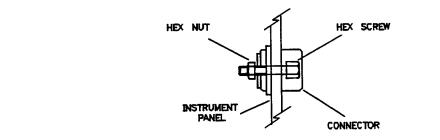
Detailed Views of Rear Panel Miscellaneous Parts
